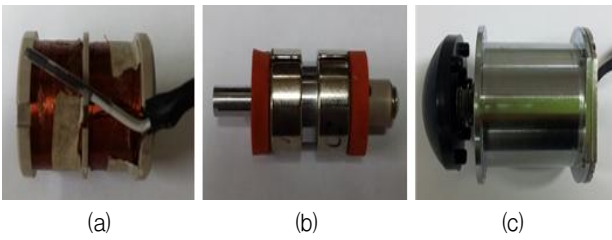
Manufactured linear motor actuator: (a) coil block, (b) magnet block, and (c) assembled actuator.
